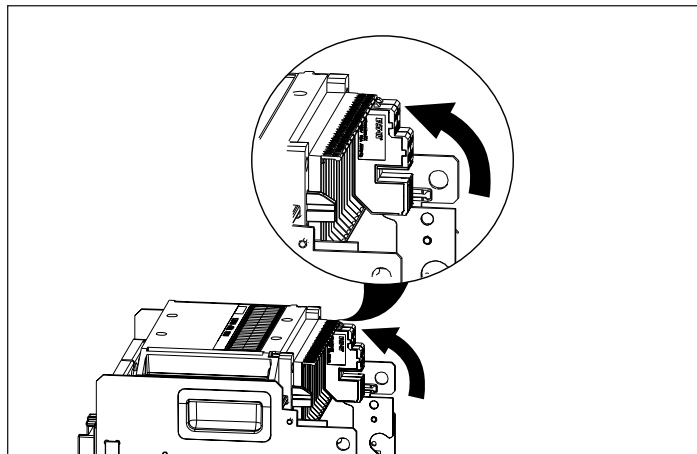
Terminal block mounting bracket and cassette secondary over label installation.
